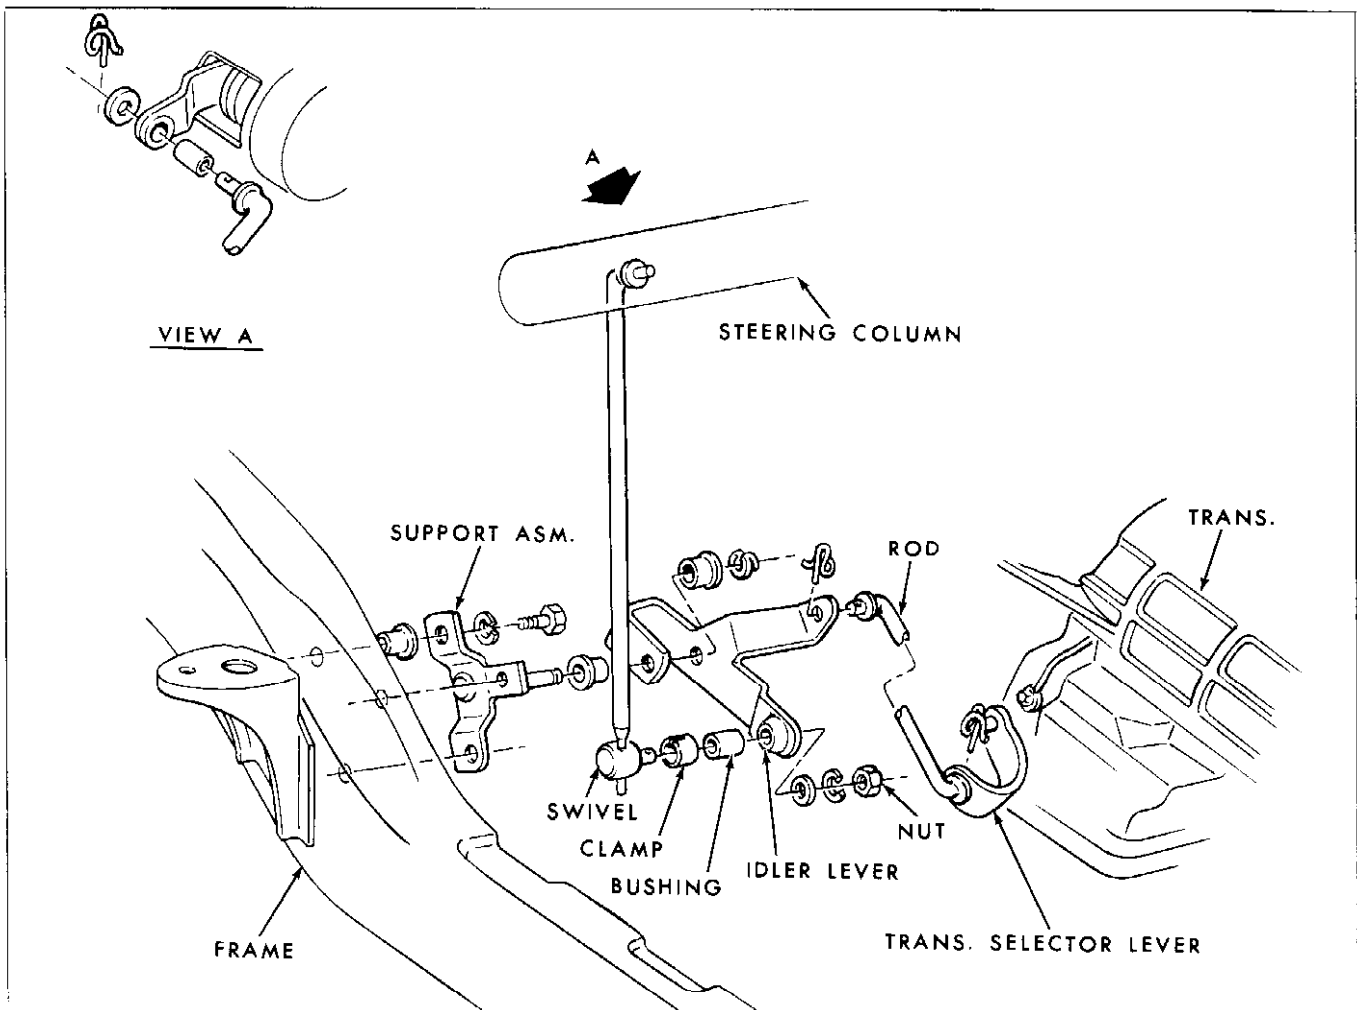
F-1 Lower Gearshift Controls - Column Shift
